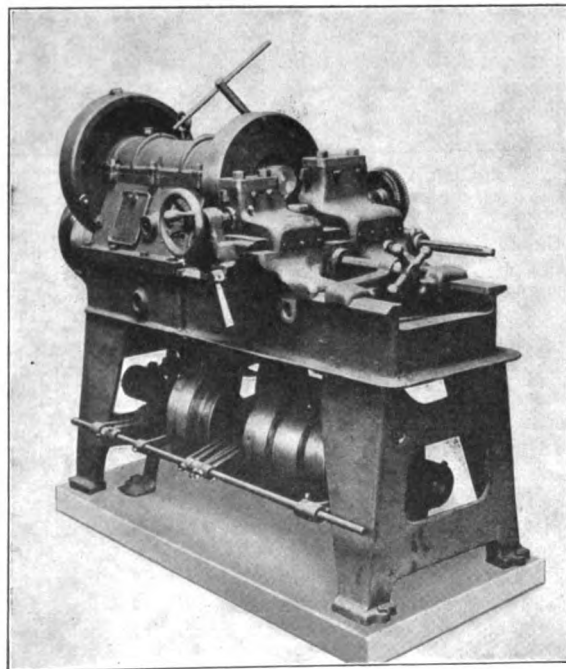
SHELL CUTTING-OFF AND FACING LATHE
